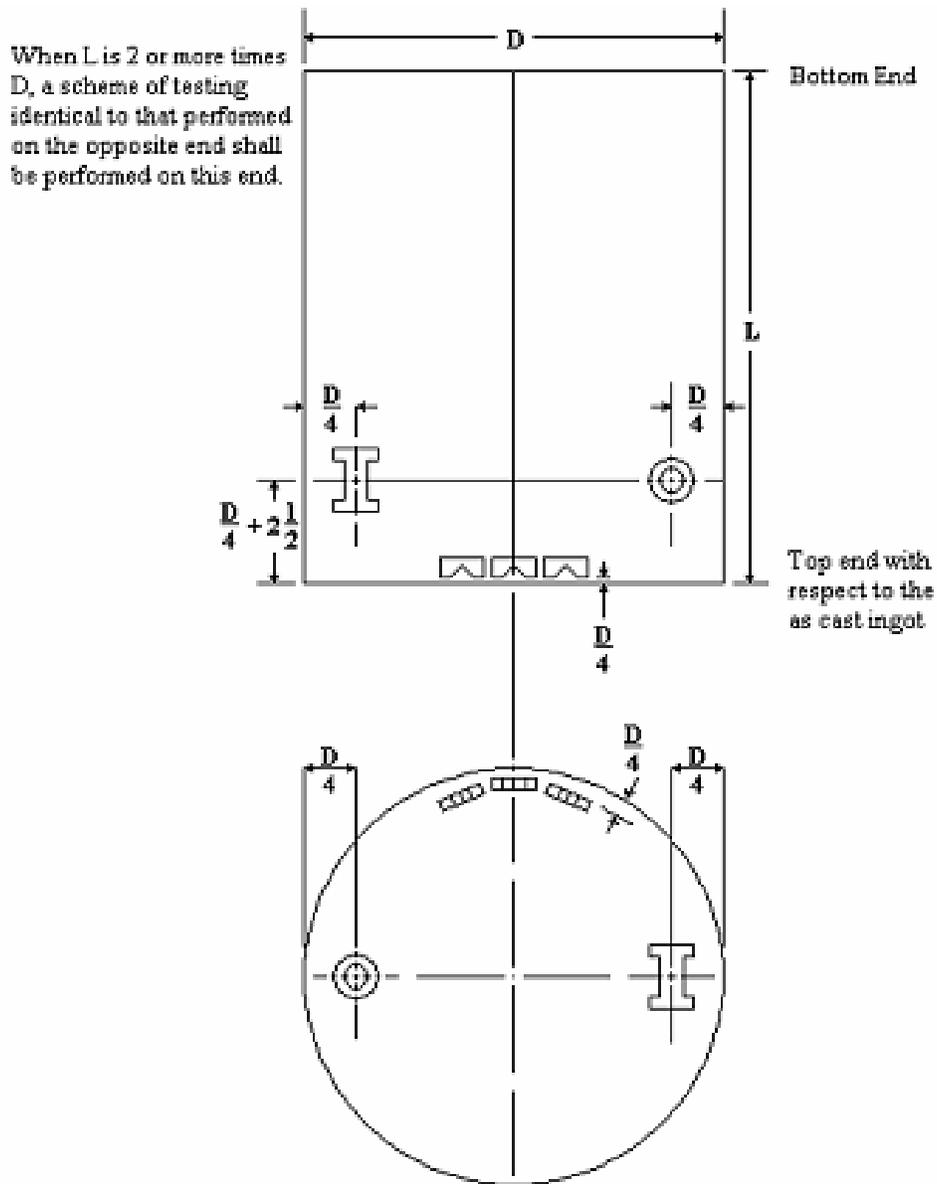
Typical Schematic Diagram of Test Specimen Location for 12-Inch Thick Forgings of Solid Circular Cross Section (See C.4.4.2.2 for details on test specimen location.)
